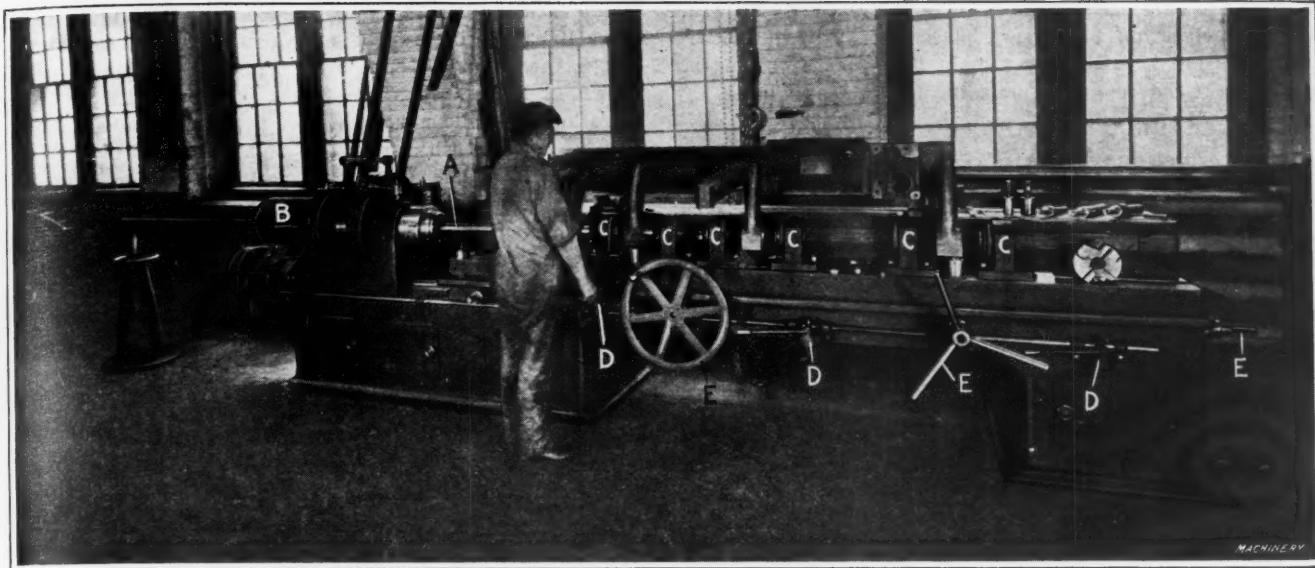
Horizontal Boring Machine designed for boring Camshaft Arms of Automatics
